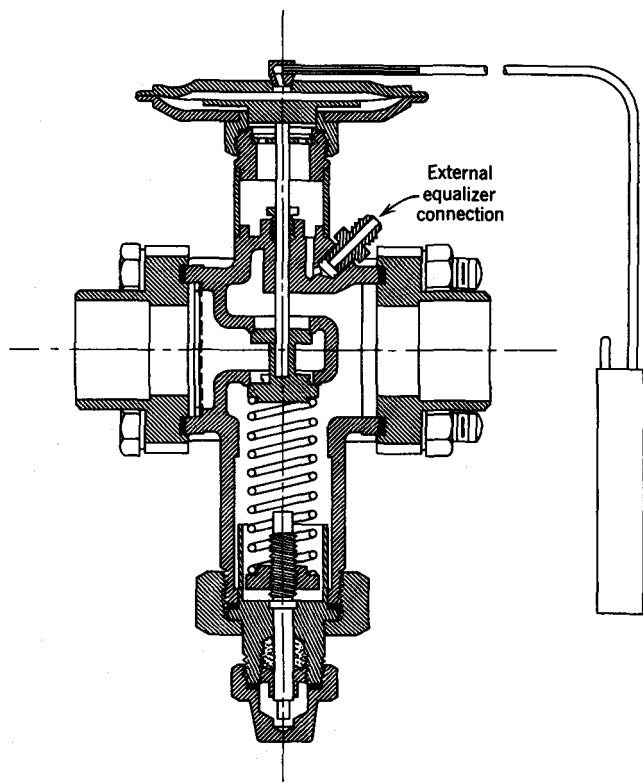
Externally equalized thermostatic expansion valve. (Courtesy Sporlan Valve Company.)
